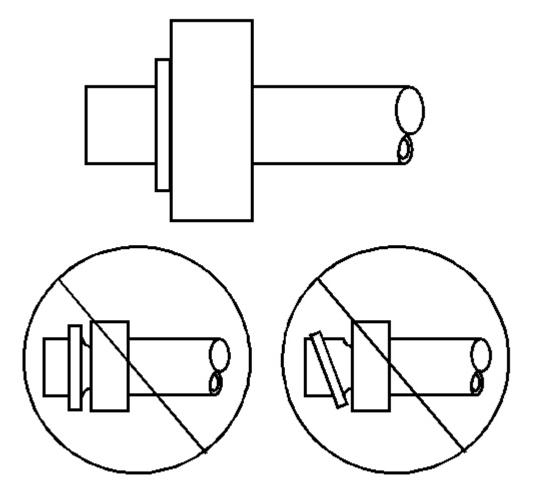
Identifying Good And Rad Sealing Washer Positions
